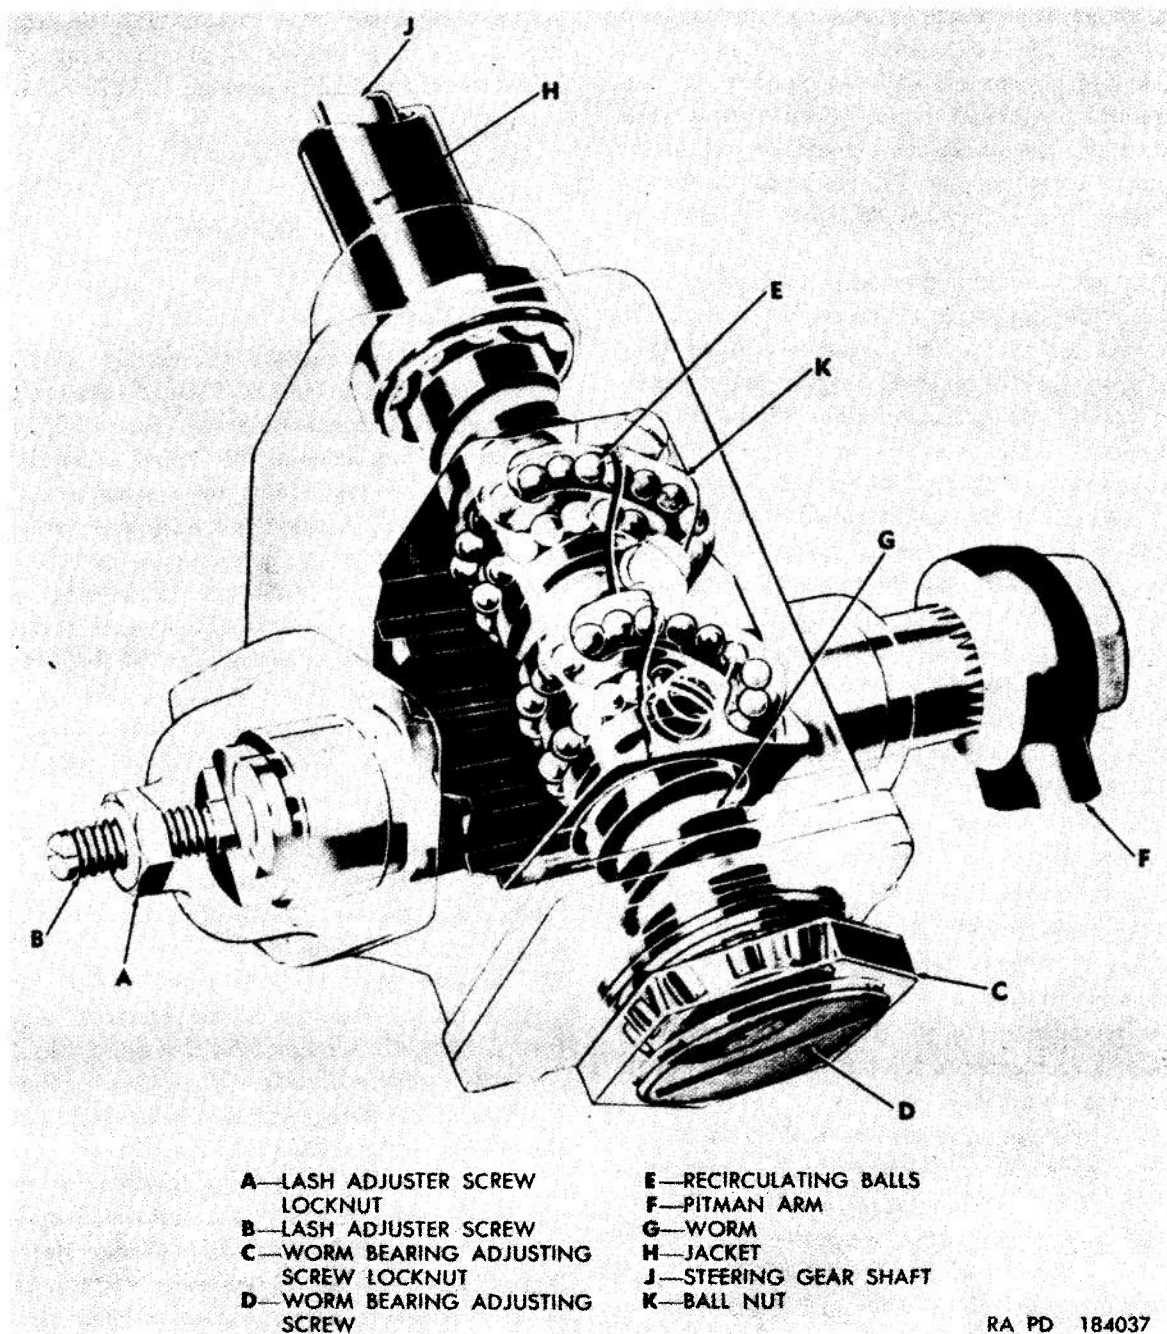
Worm-and-Nut Steering Gear (Recirculating Ball-Type)
